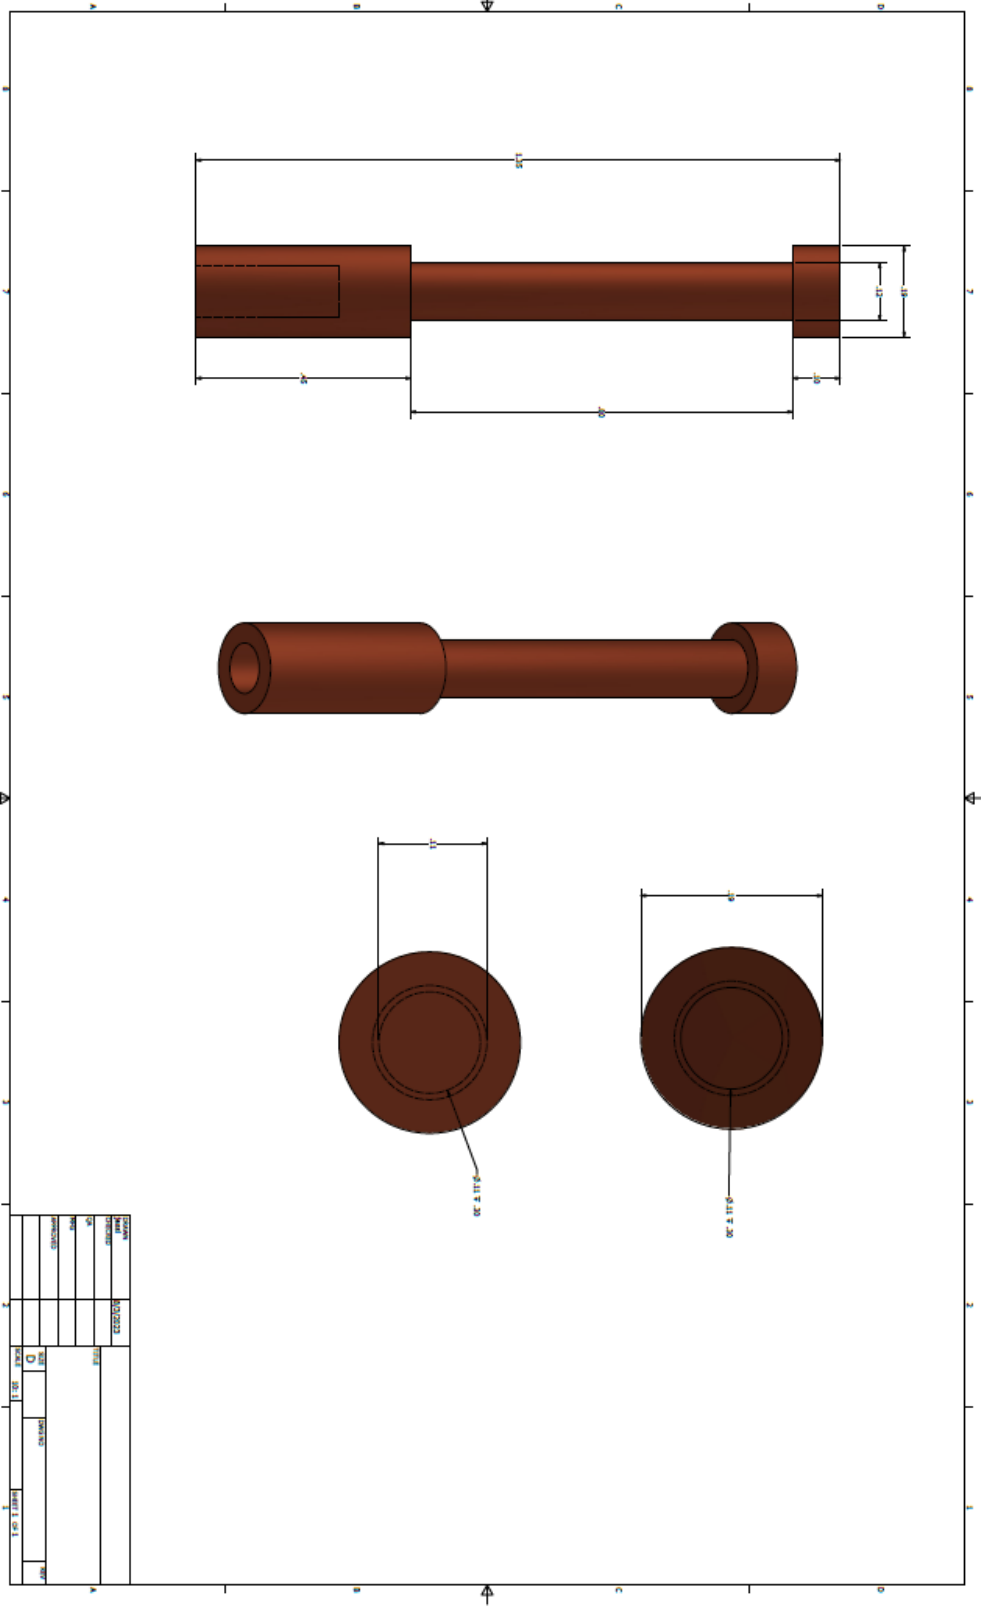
Magic-angle adjust mechanism connector for cross-coil probe.
